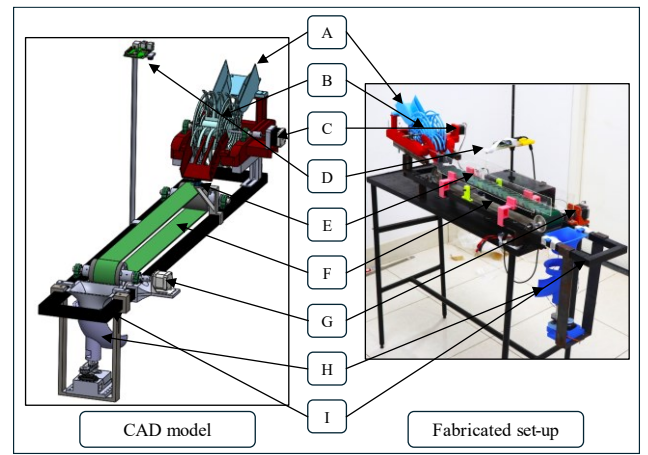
CAD model and the fabricated sorter machine consisting of following modules: A. Feeder, B. Scooper, C. Stepper motor for scooper, D. Camera Unit, E. IR sensor, F. Conveyor belt, G. Stepper motor for conveyor belt, H. Sorter, I. Metal chassis for mounting all subsystems
